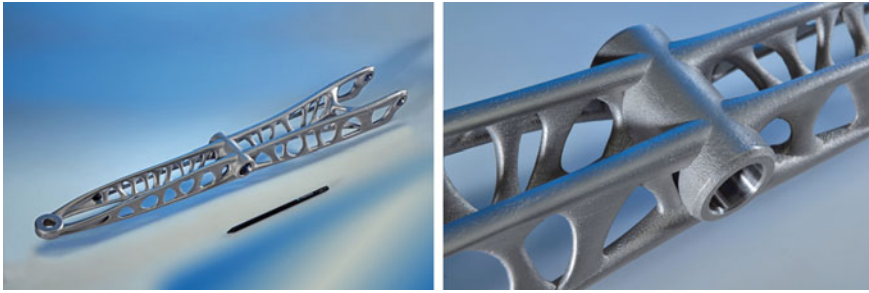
Demonstrator part made of 316L manufactured in the prototype machine
